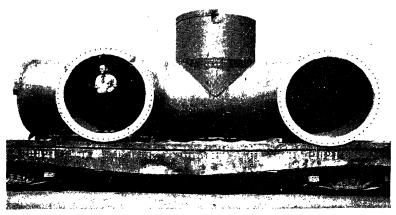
Welded pipe construction. (Bethlehem Steel Co.)
